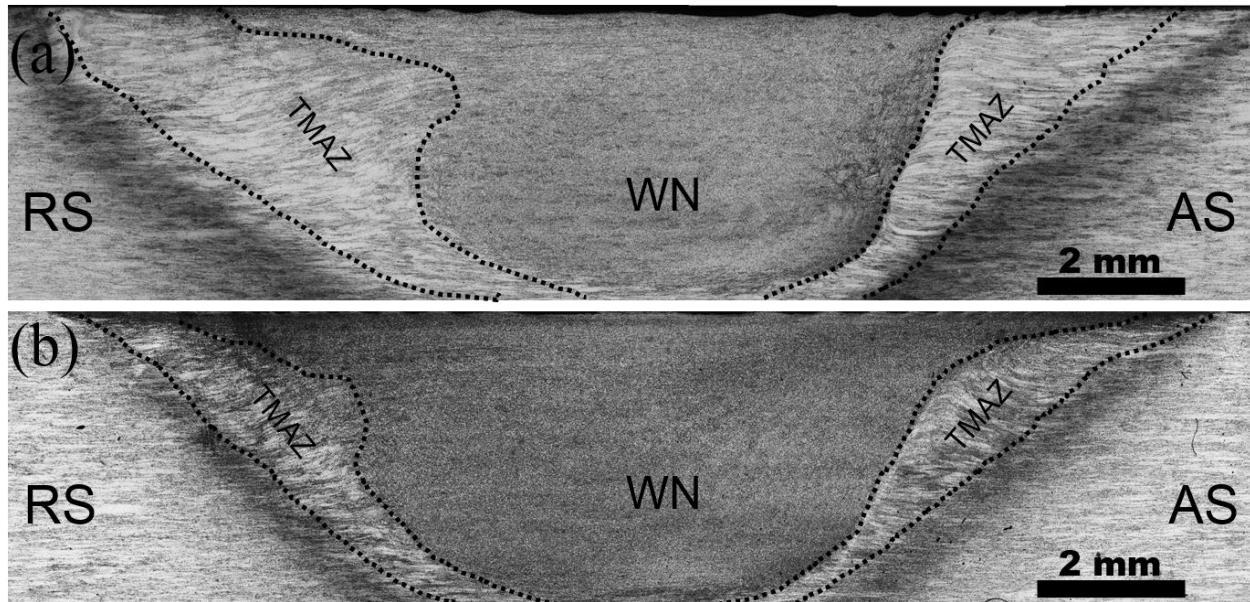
Macrograph of weld cross section of (a) FSW of 2199 and (b) UWFSW of 2199.
